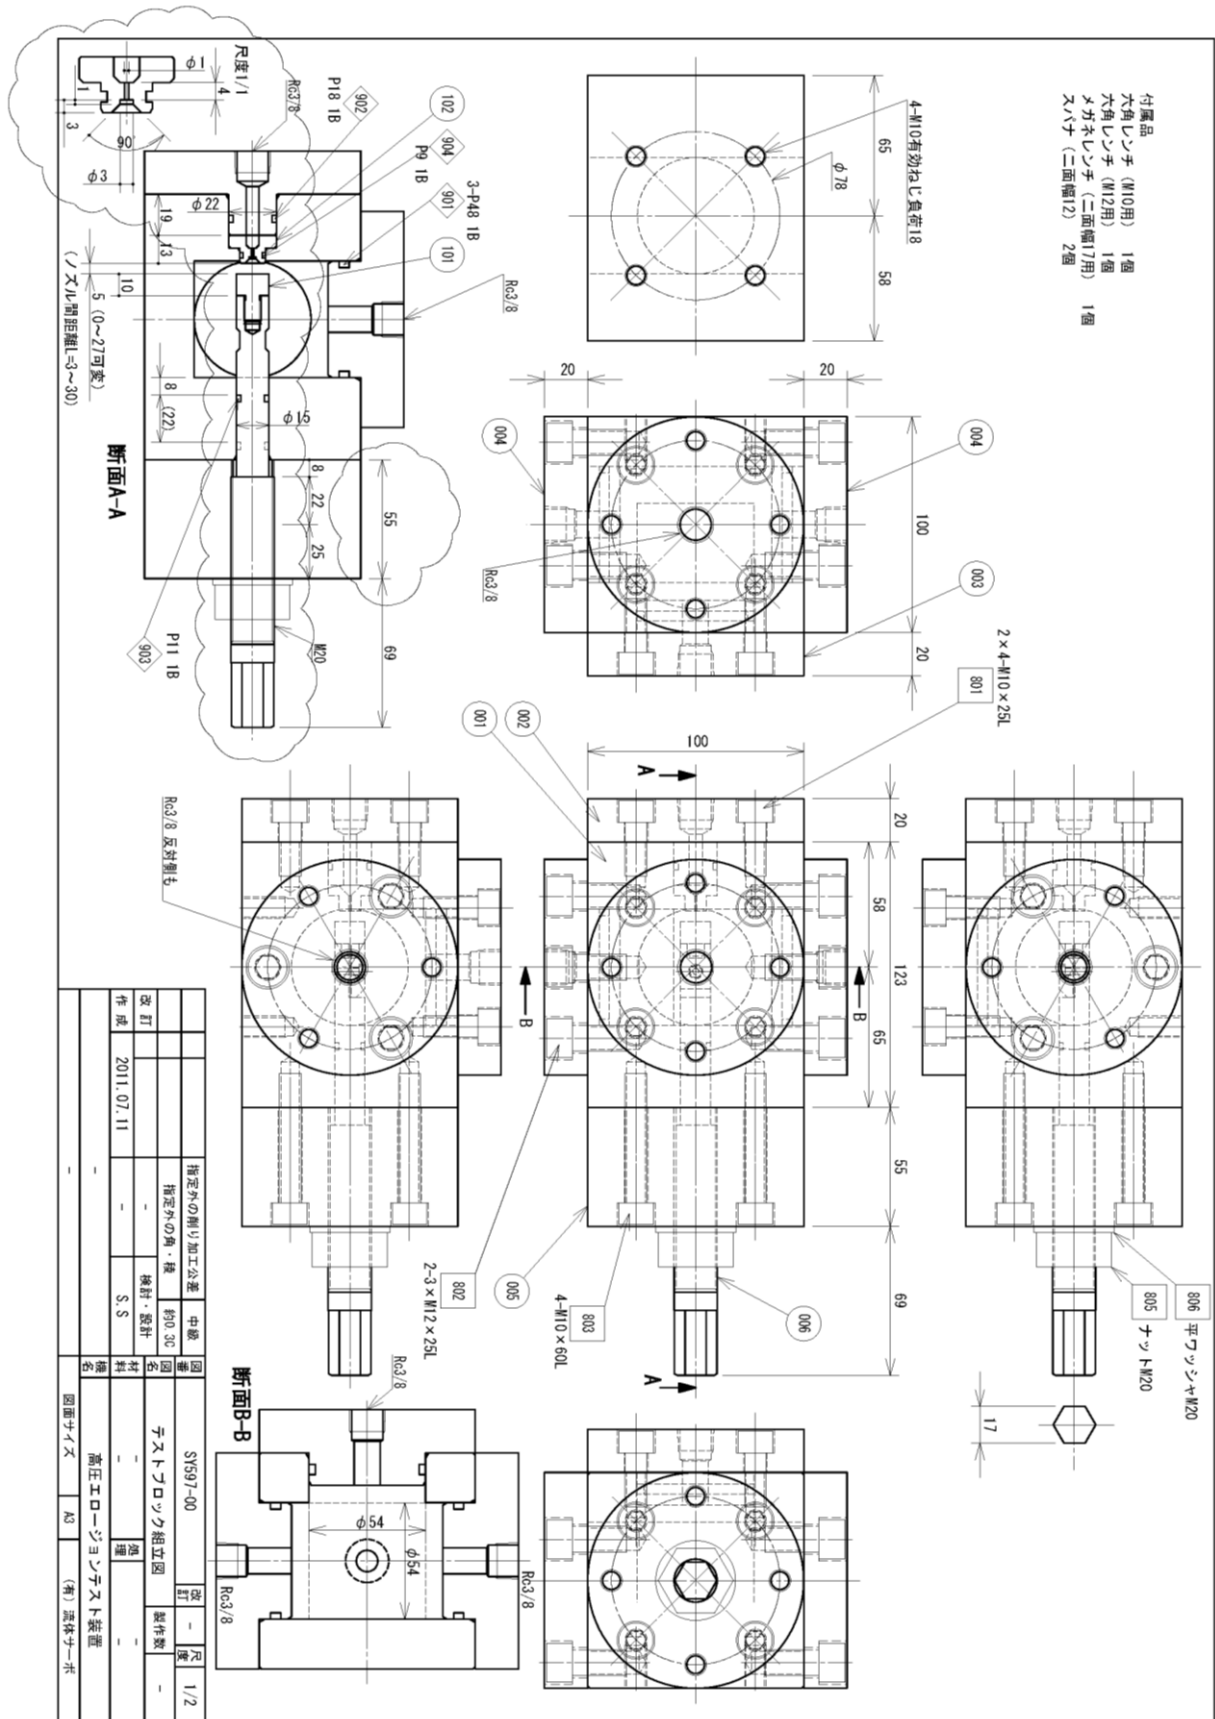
Drawing of test chamber for cavitation erosion test
